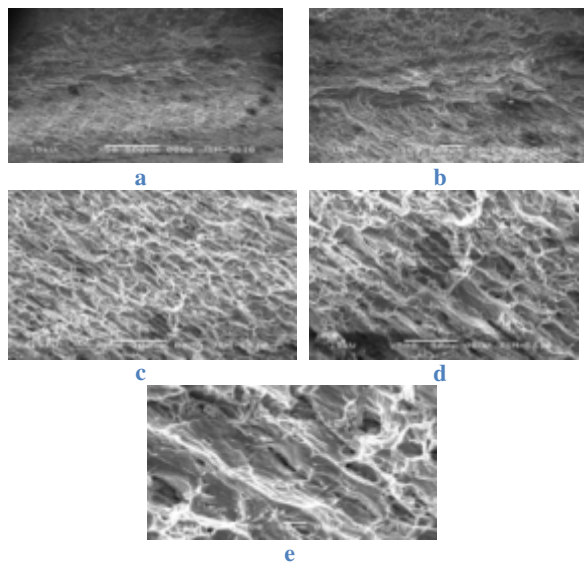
Fractograph of weld sample prepared at 1070 rpm tool rotation speed and 78 mm/min welding speed a. 50x b.100x c,250x, d. 500x, e. 1000x magnification
